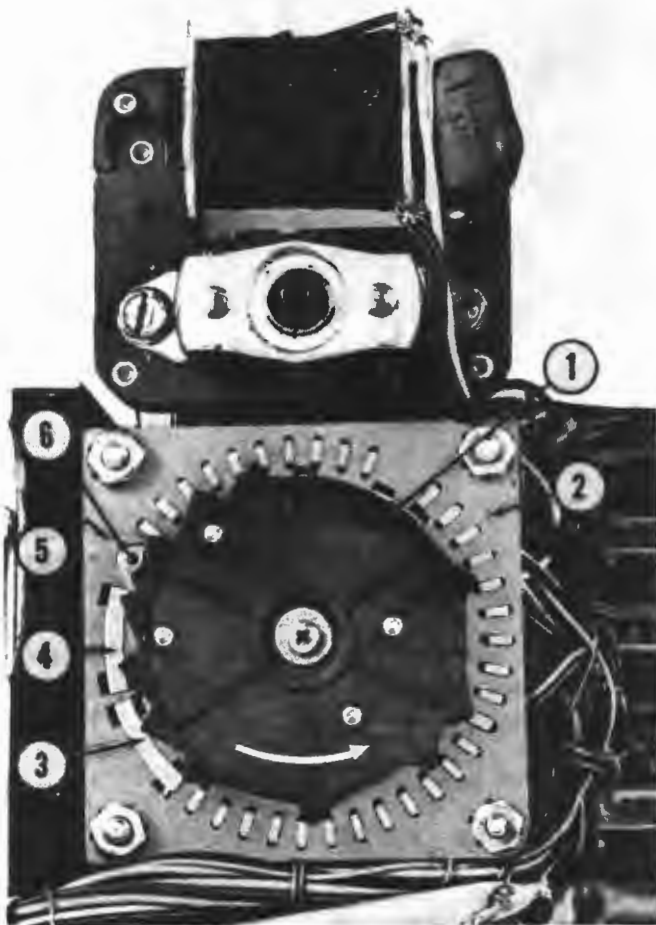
SELECTOR SWITCH LATCH ADJUSTMENT
